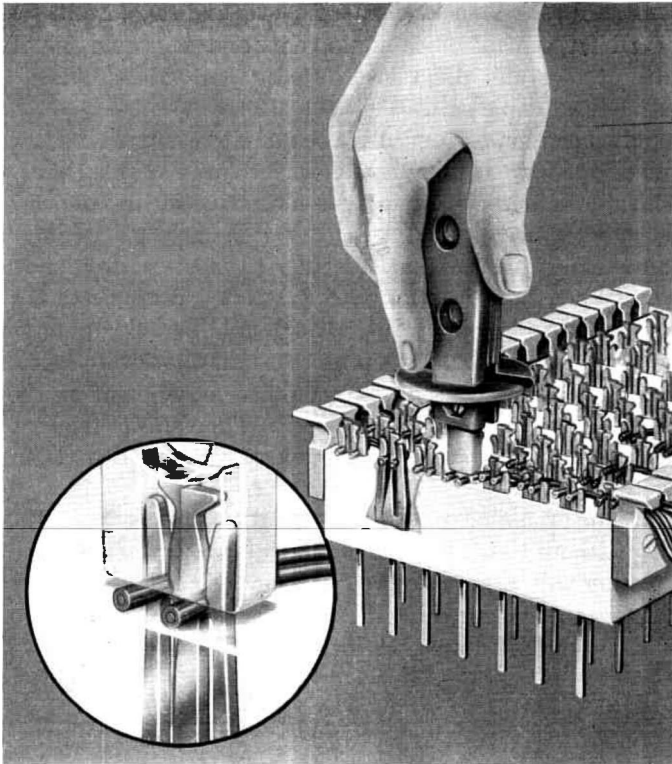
Distributing frame connecting blocks and insertion tool.
